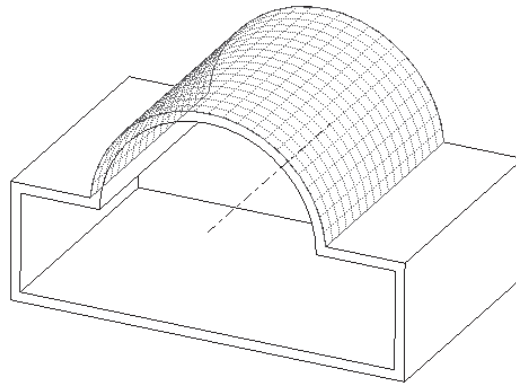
Datum axis passing through the center of a cylinder
